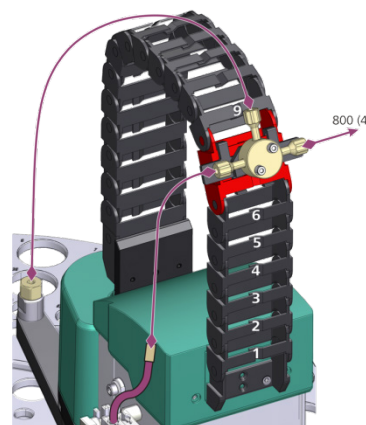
Mounting of the T connector (6.2744.290) with adapter plate on alternative type of the guide chain.
